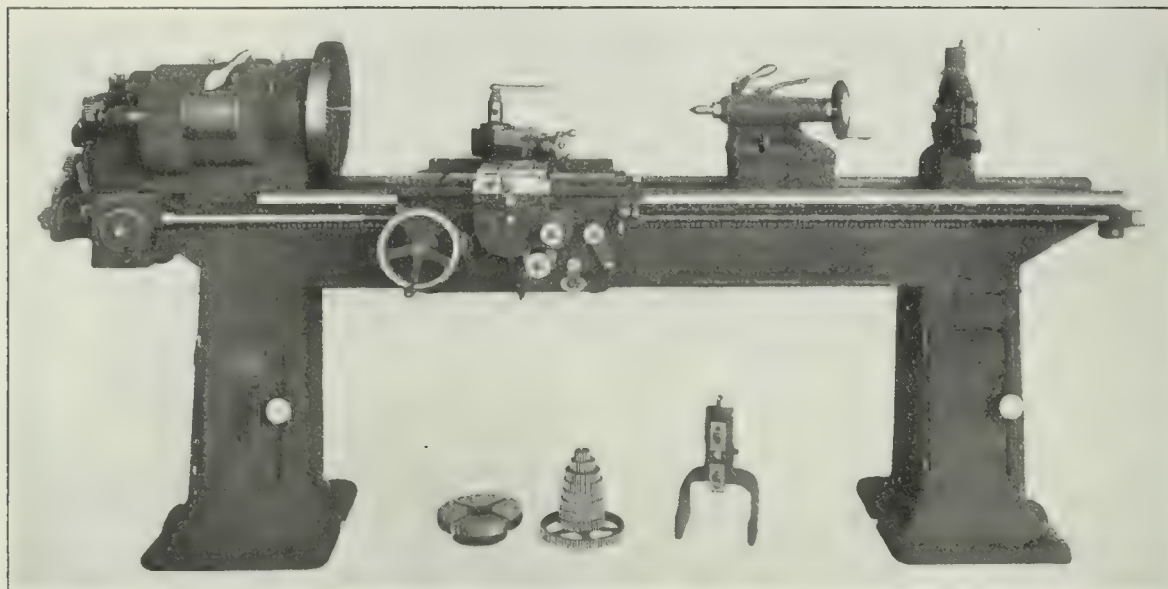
The Schellenbach 16-In. Lathe with an 8-Ft. Bed Made by the John B. Morris Machine Tool Company, Cincinnati, Ohio.
